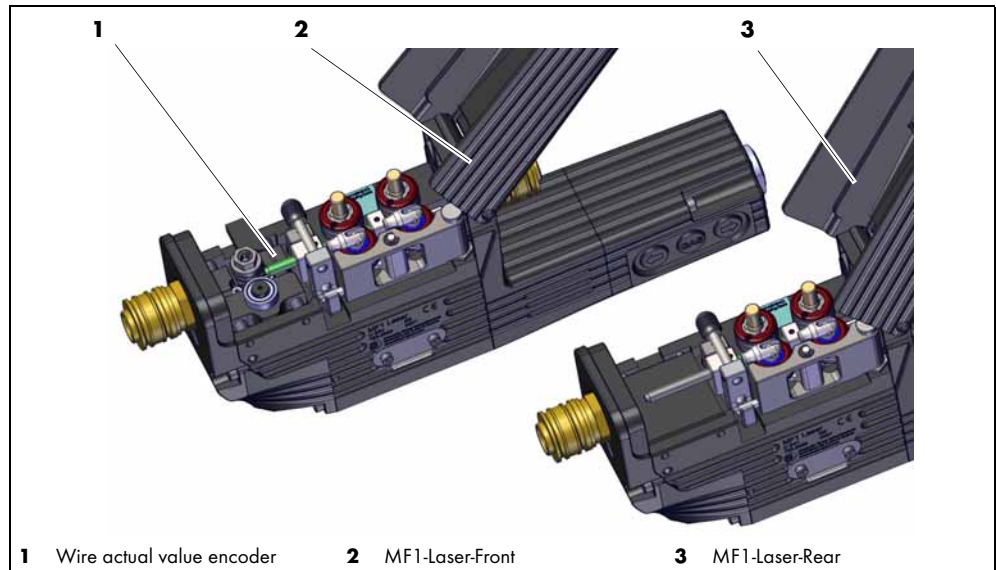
MF1-Laser Front/MF1-Laser Rear
